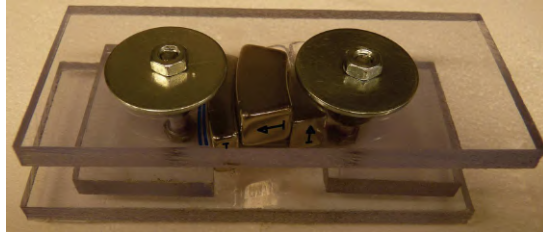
Auxiliary tool developed by Abrahamsson et al. [109] to assemble one triplet of PM segments.
